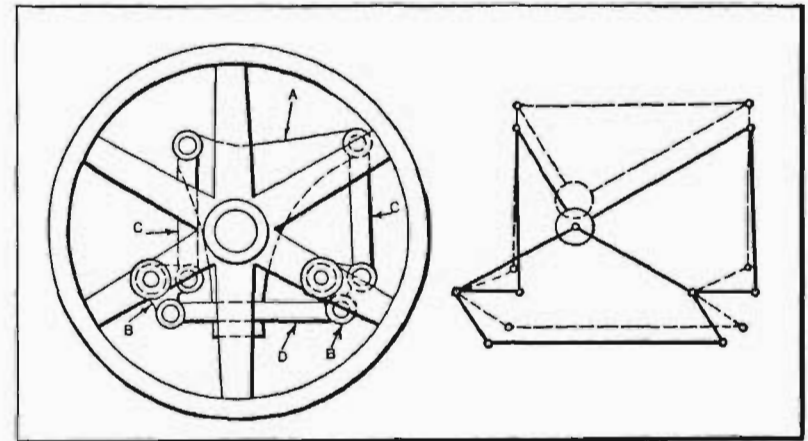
Shaft Coupling Designed for Lateral or Angular Displacement
